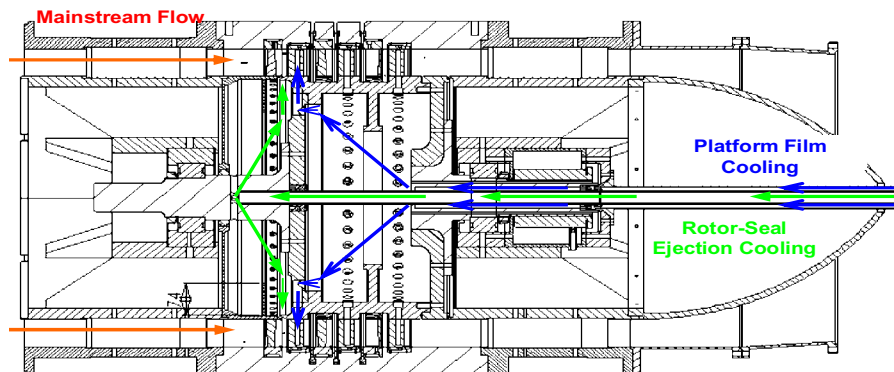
Section view of the modified stator-rotor turbine assembly for stator-rotor purge flow and platform film cooling
